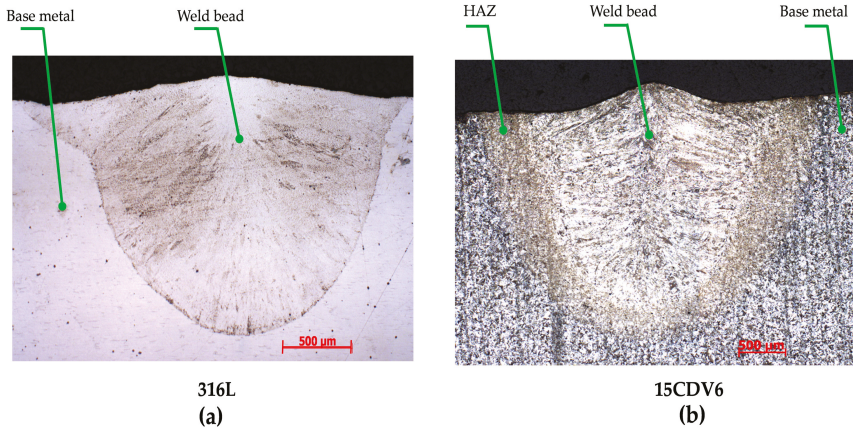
Cross-section of the weld bead (microscopic images, $v = 1600 \text{ mm}\cdot\text{min}^{-1}$): (a) 316L; (b) 15CDV6.
